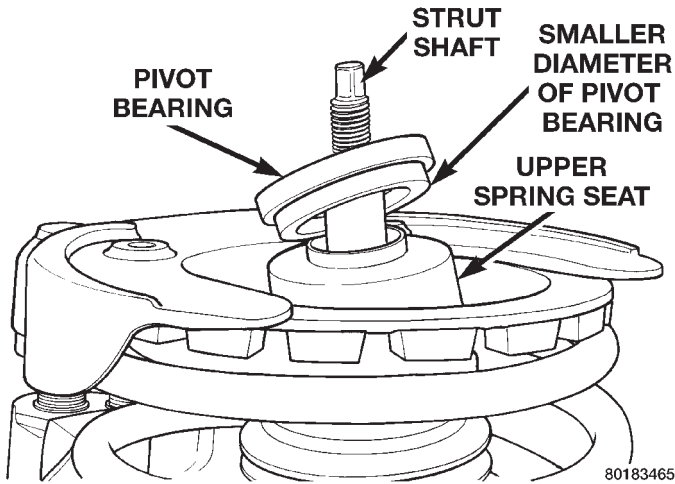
Installing Pivot Bearing On Upper Spring Seat
